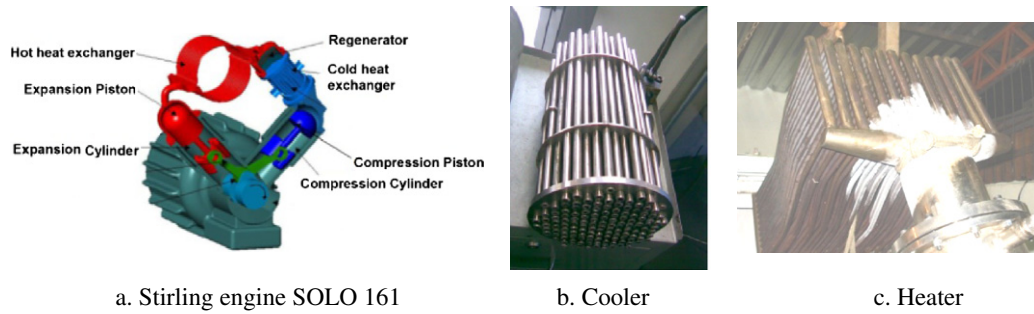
SOLO 161 engine, shell-and-tube cooler and heater, after [1].
